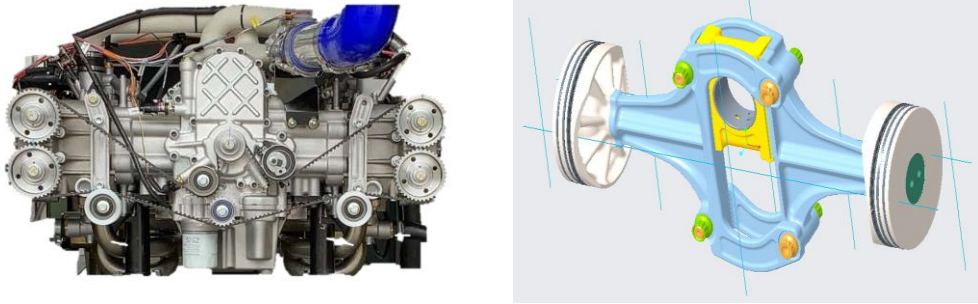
Downsize engine equipped with a Scotch yoke (a) Engine outer shell;
